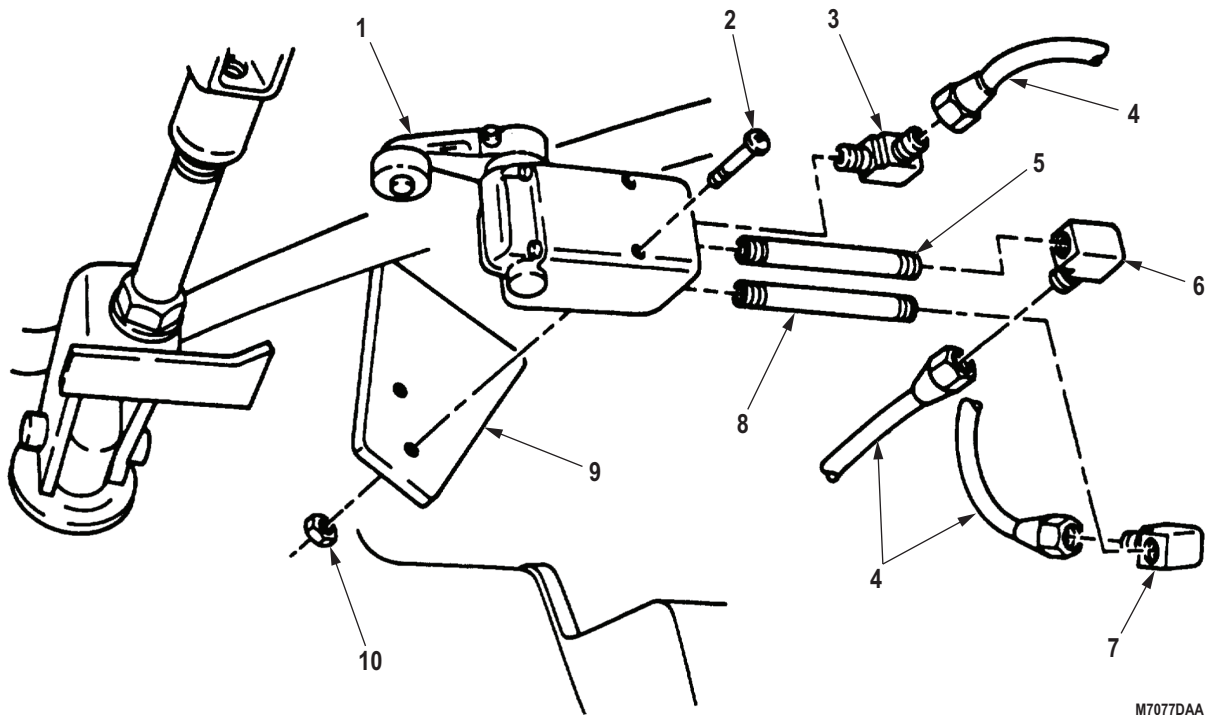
Transfer Case Front Axle Engagement Valve Removal.
